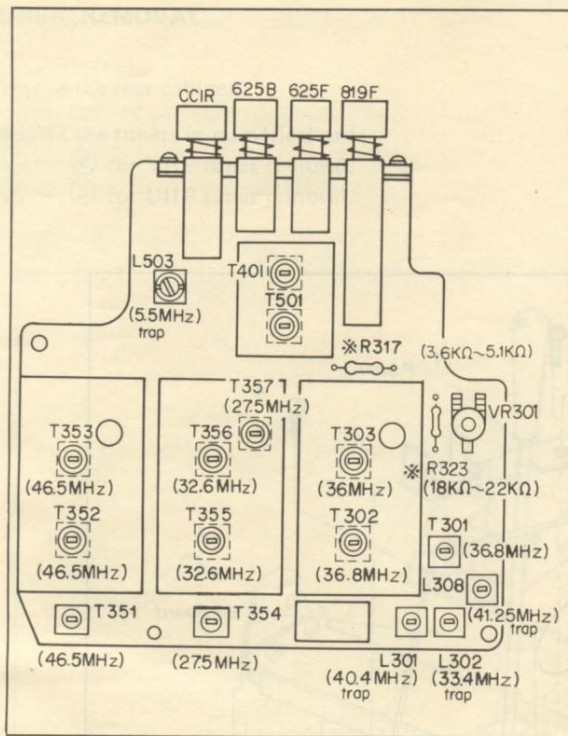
Adjusting parts location of VIF and SIF adjustment
